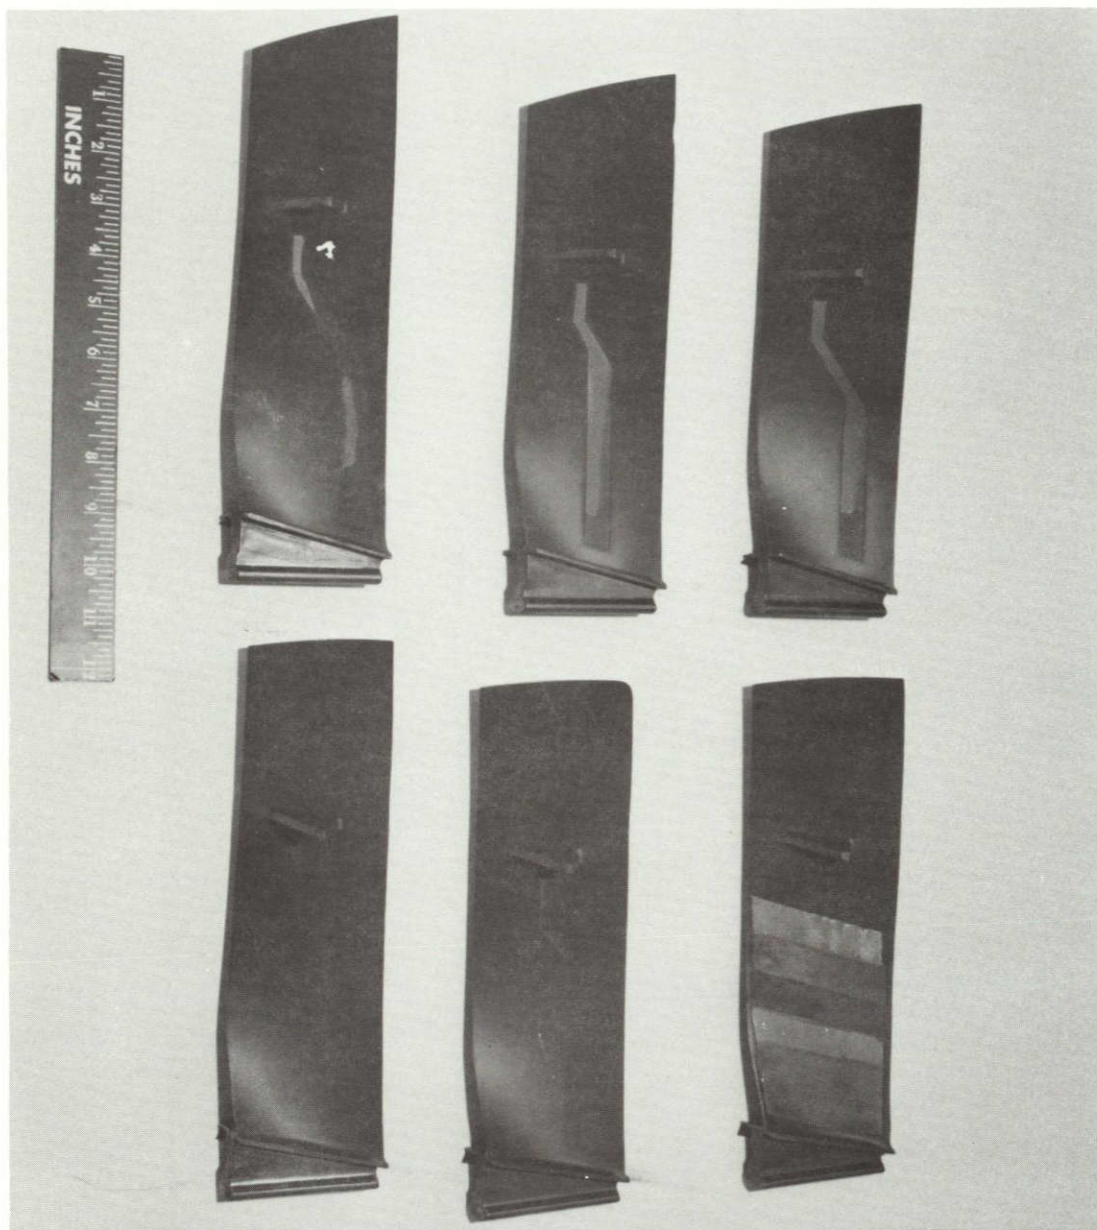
Erosion Patch First Stage Blades S/N 30, 33, 34, 36, 37, 38 After Testing (78-444-0374-C)
